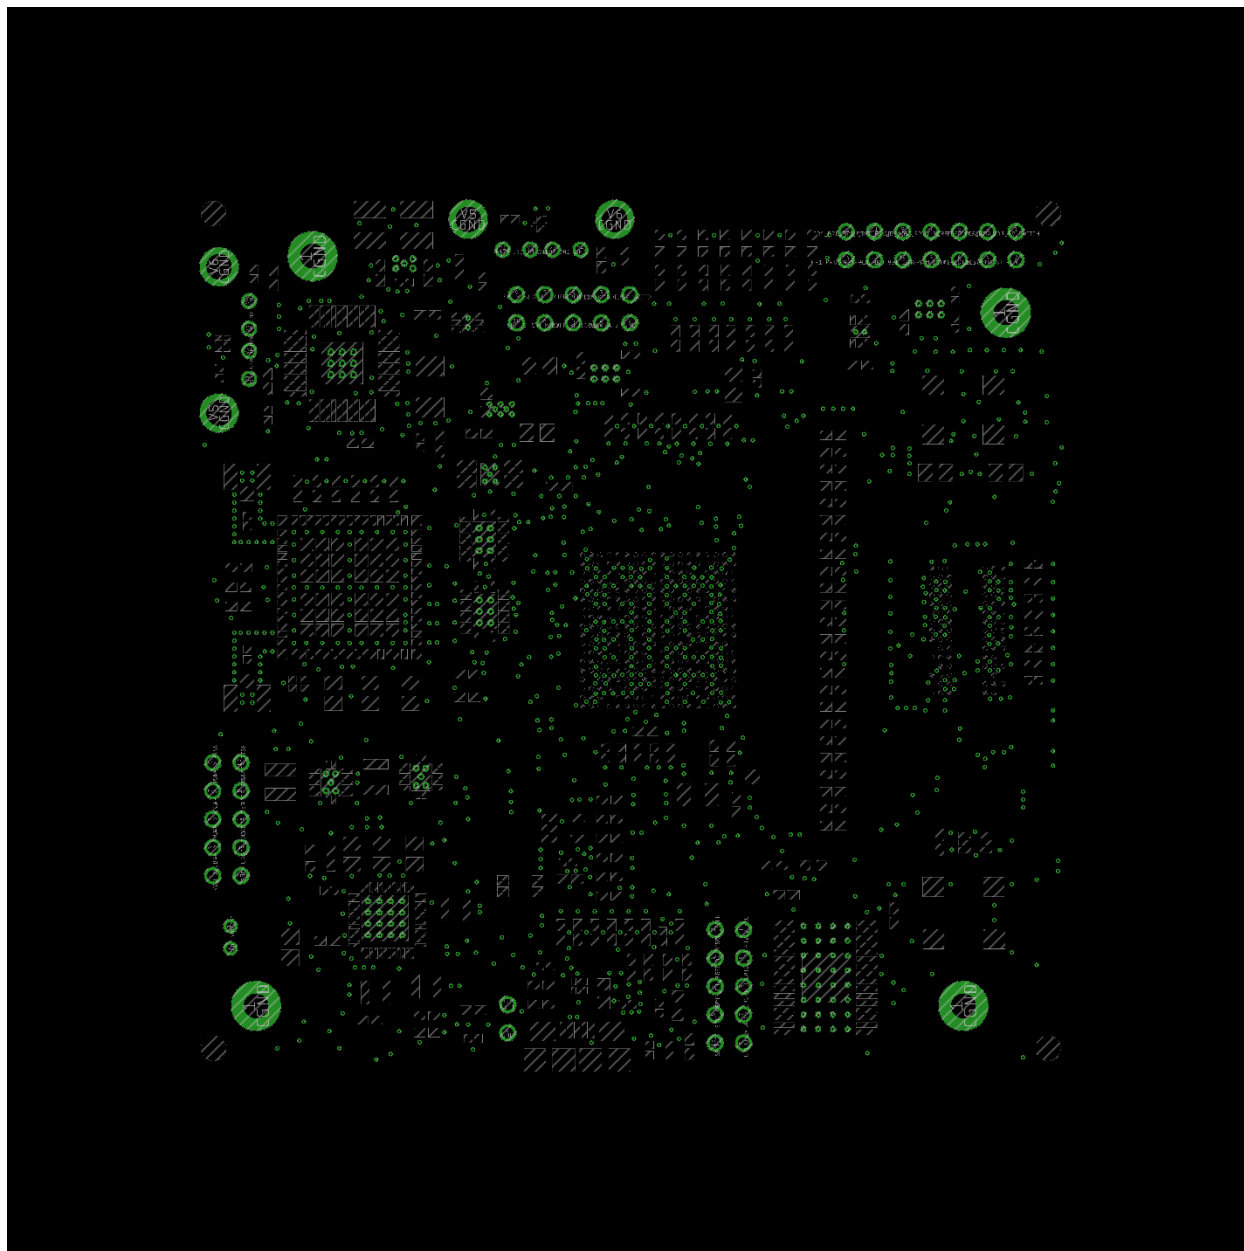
Top layer solder mask of the main electronic board including all vias and pads.
